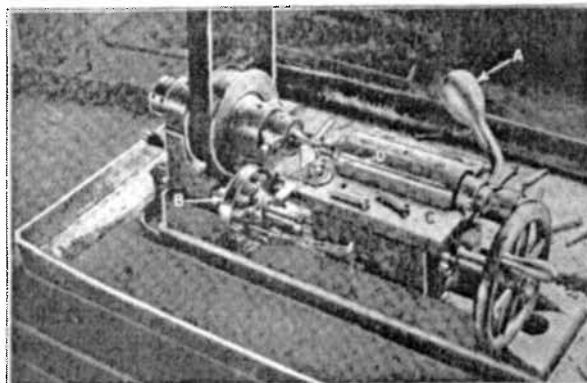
A SPECIAL COUNTERBORING MACHINE
